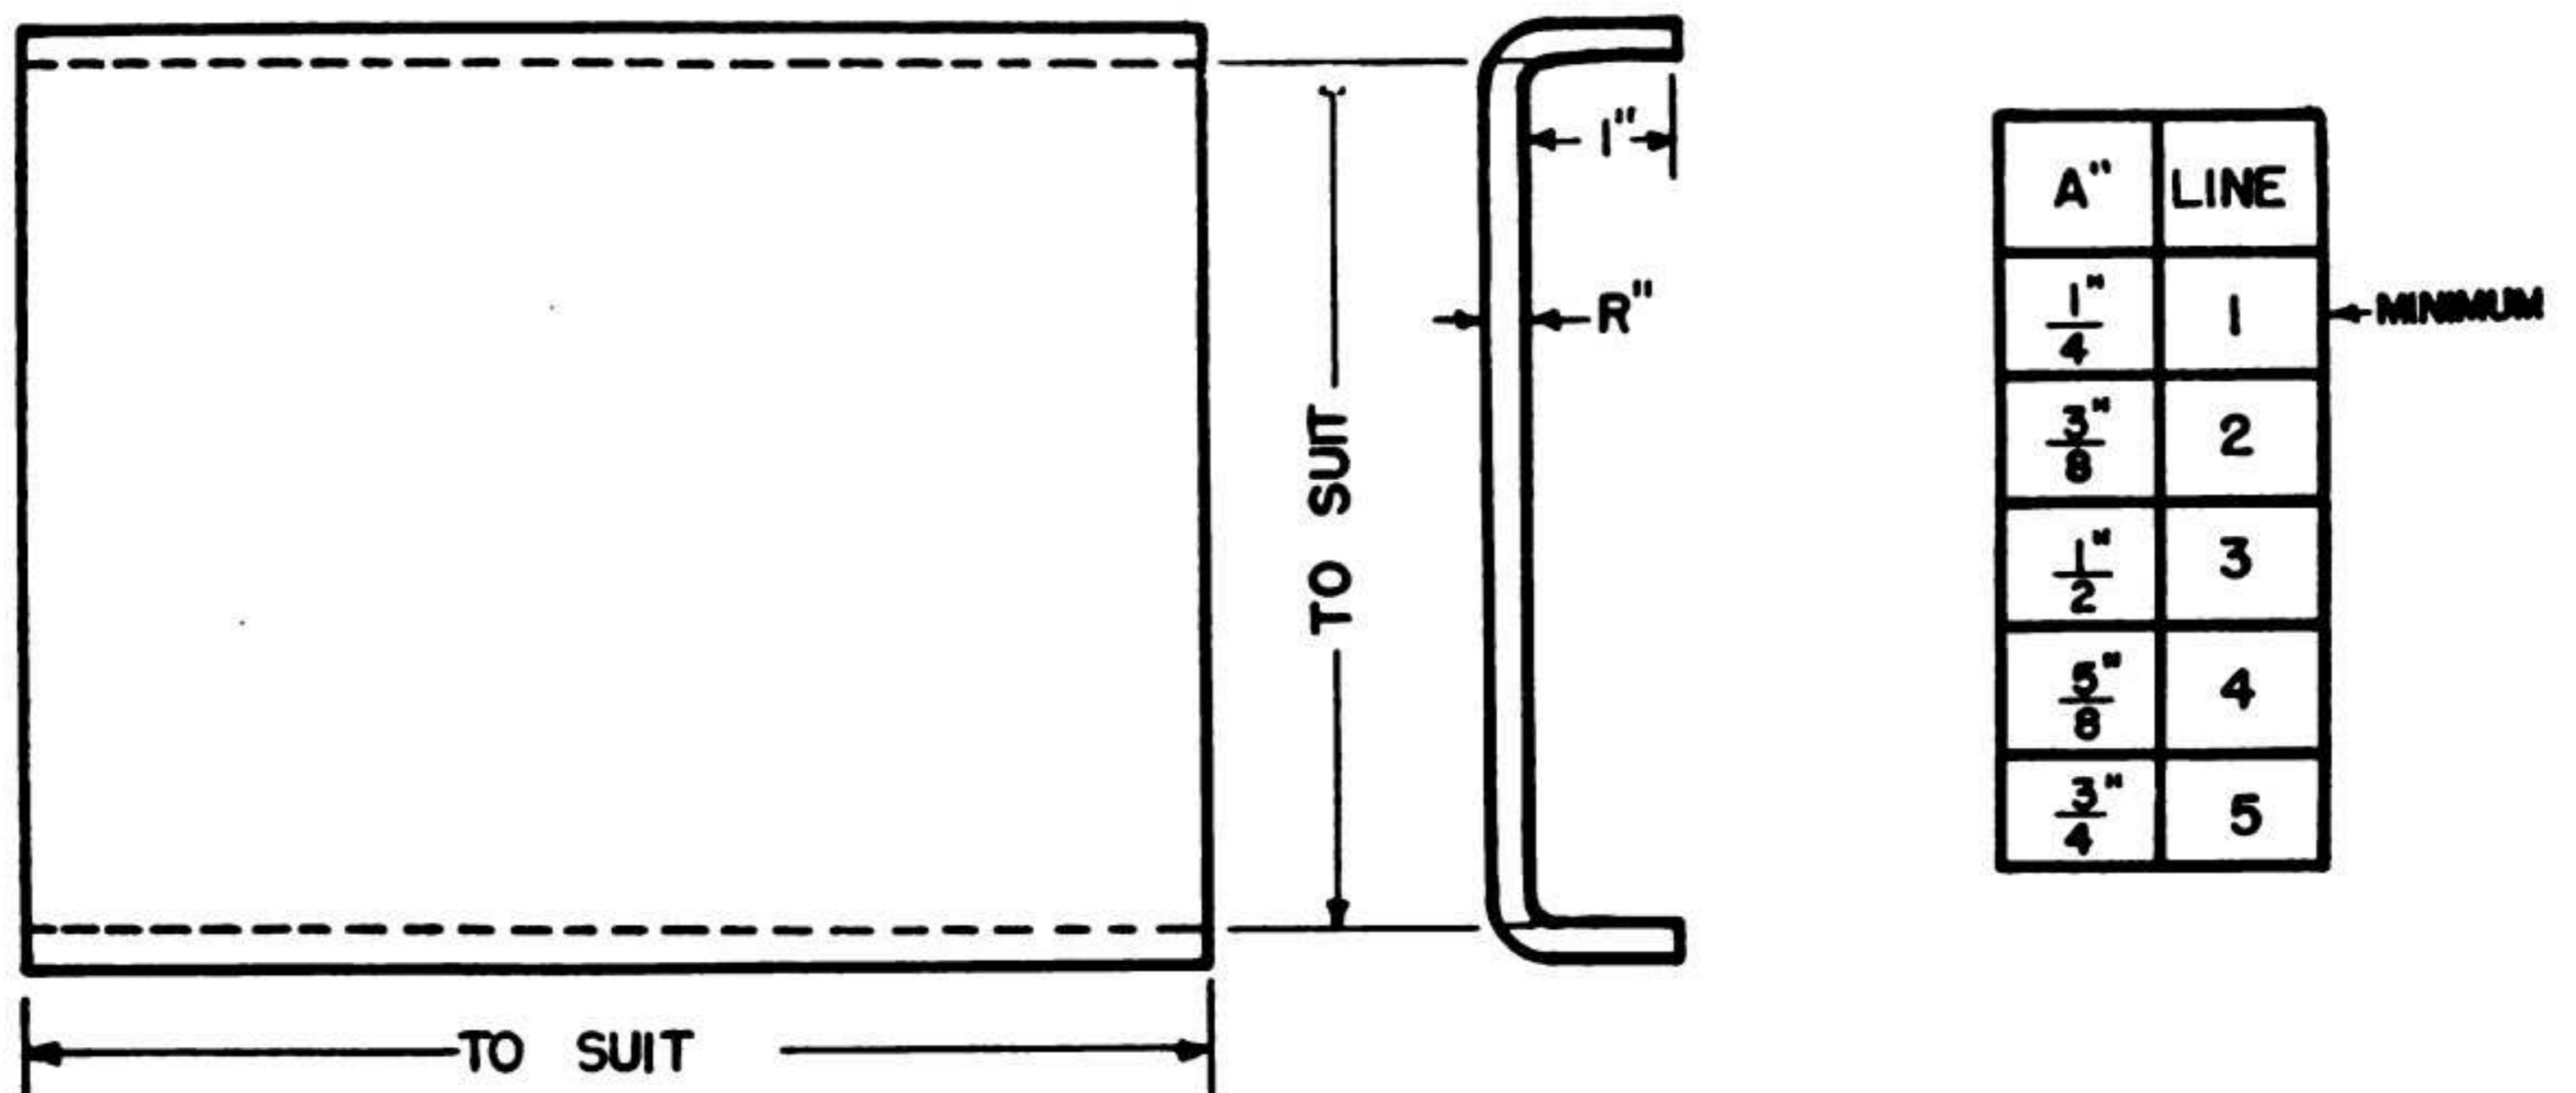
This style coupler shim of proper thickness, width, and length may be used without any shaping when welding or riveting facilities are available.
